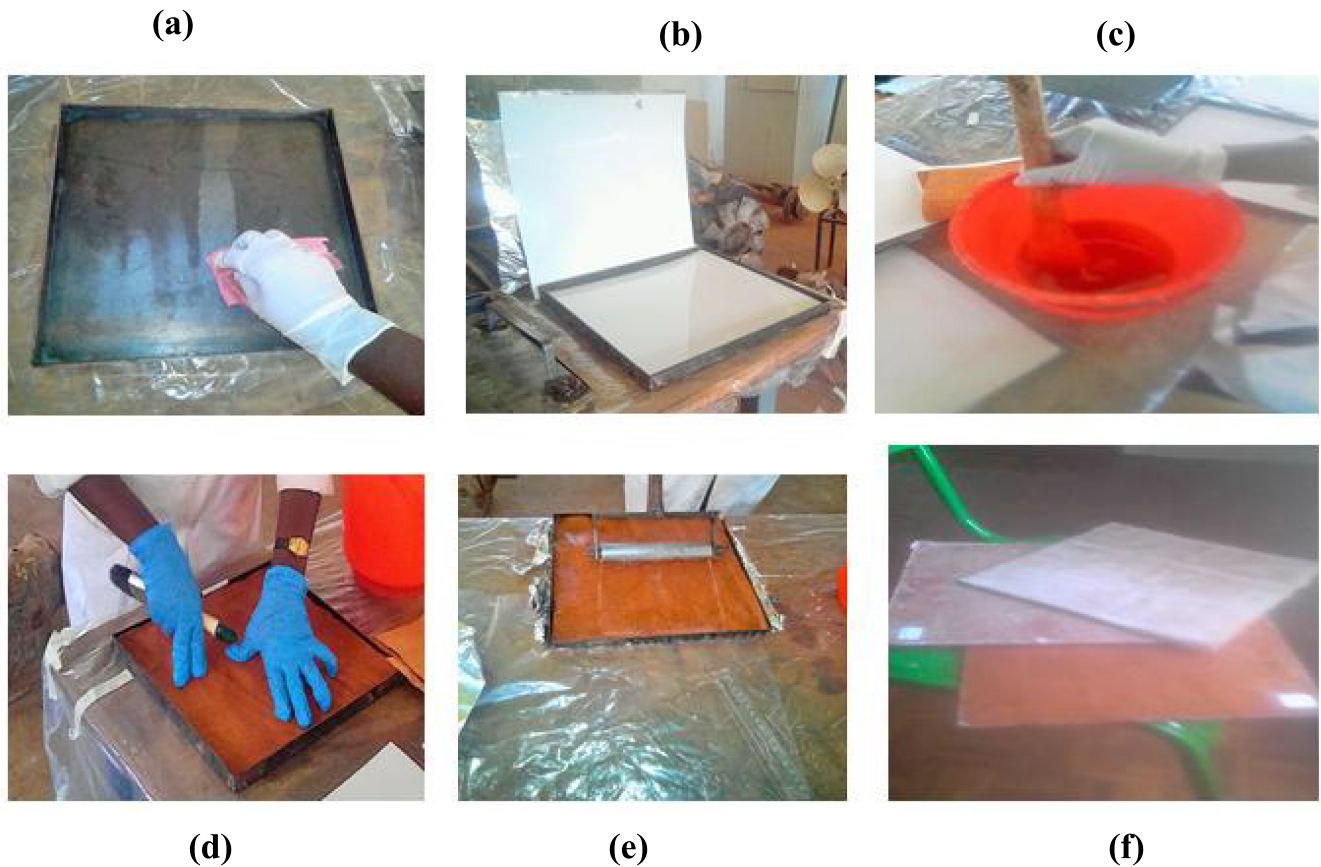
| Composite fabrication (a) cleaning mold; (b) mold set up; (c) mixing resin and catalyst; (d) laying reinforcements and resin impregnation; (e) bubble removal and squeezing out excess resin using a roller prior to drying; (f) fabricated composites.
